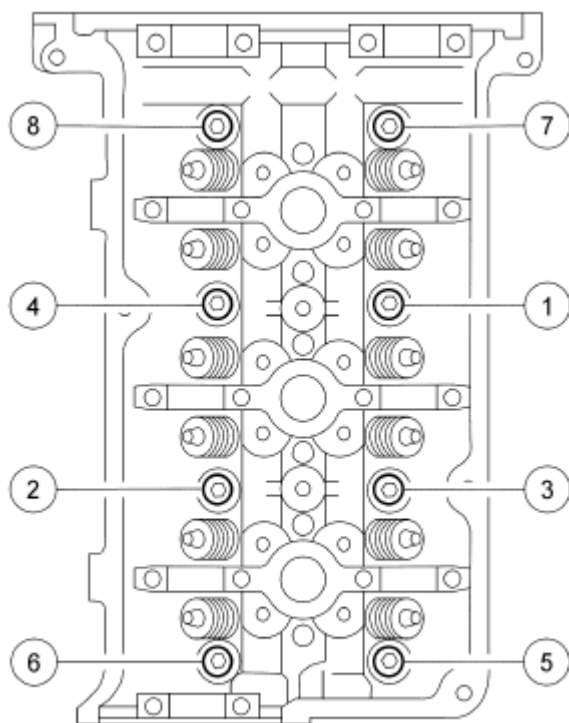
Identifying Installing Sequence Of Cylinder Head Bolts - Early Build Engines
